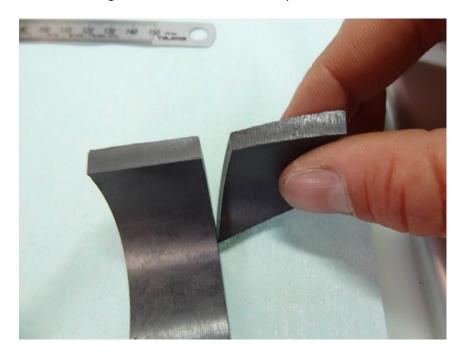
Edge view of the 2 samples: cut without the B axis (left) and with the B axis (right)
